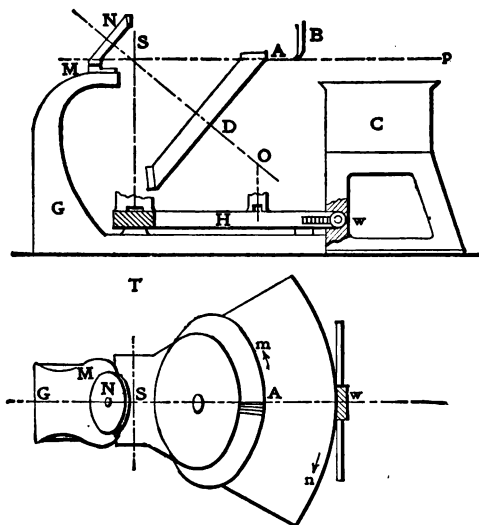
Hagen-Torn's Involute Tooth Generator—1872.
